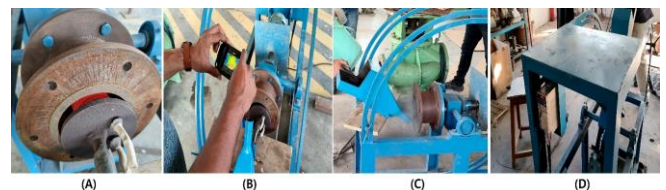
(A) Heating of the mold (B) Temp. measurement after heating (C) Mold coating (C) VFD to control RPM
